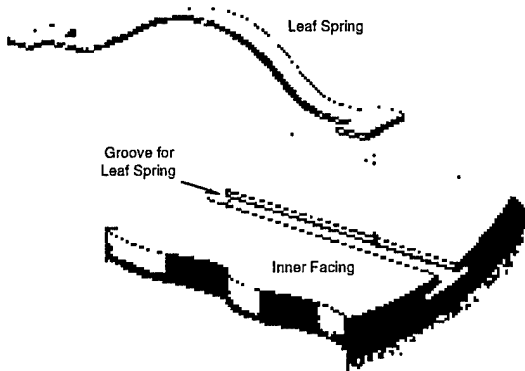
Details of the leaf spring and its T-groove on the inner facing.
